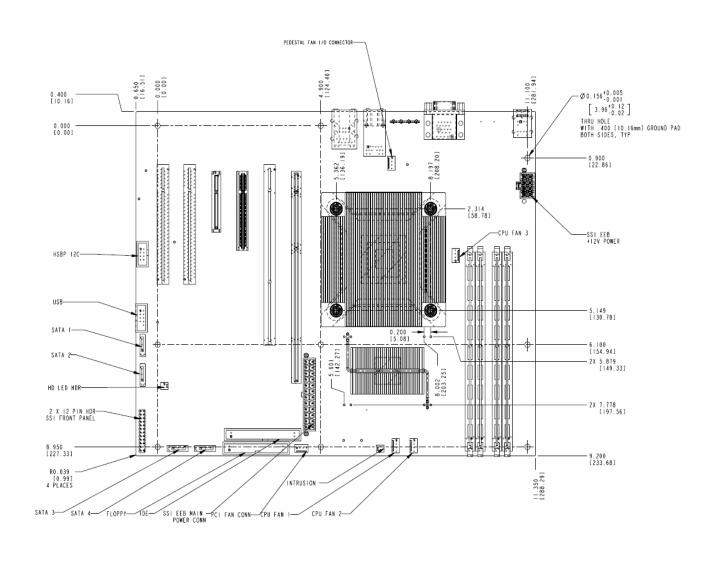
Intel[®] Server Board S3000AHLX – Hole and Component Positions (1 of 2)
